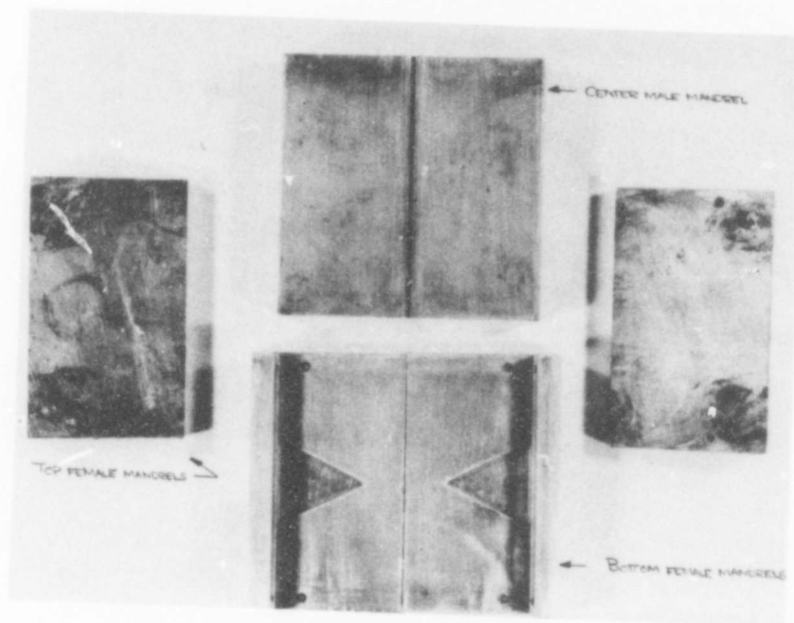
Aluminum Matched Metal Molds Used To Fabricate End Attachments.
